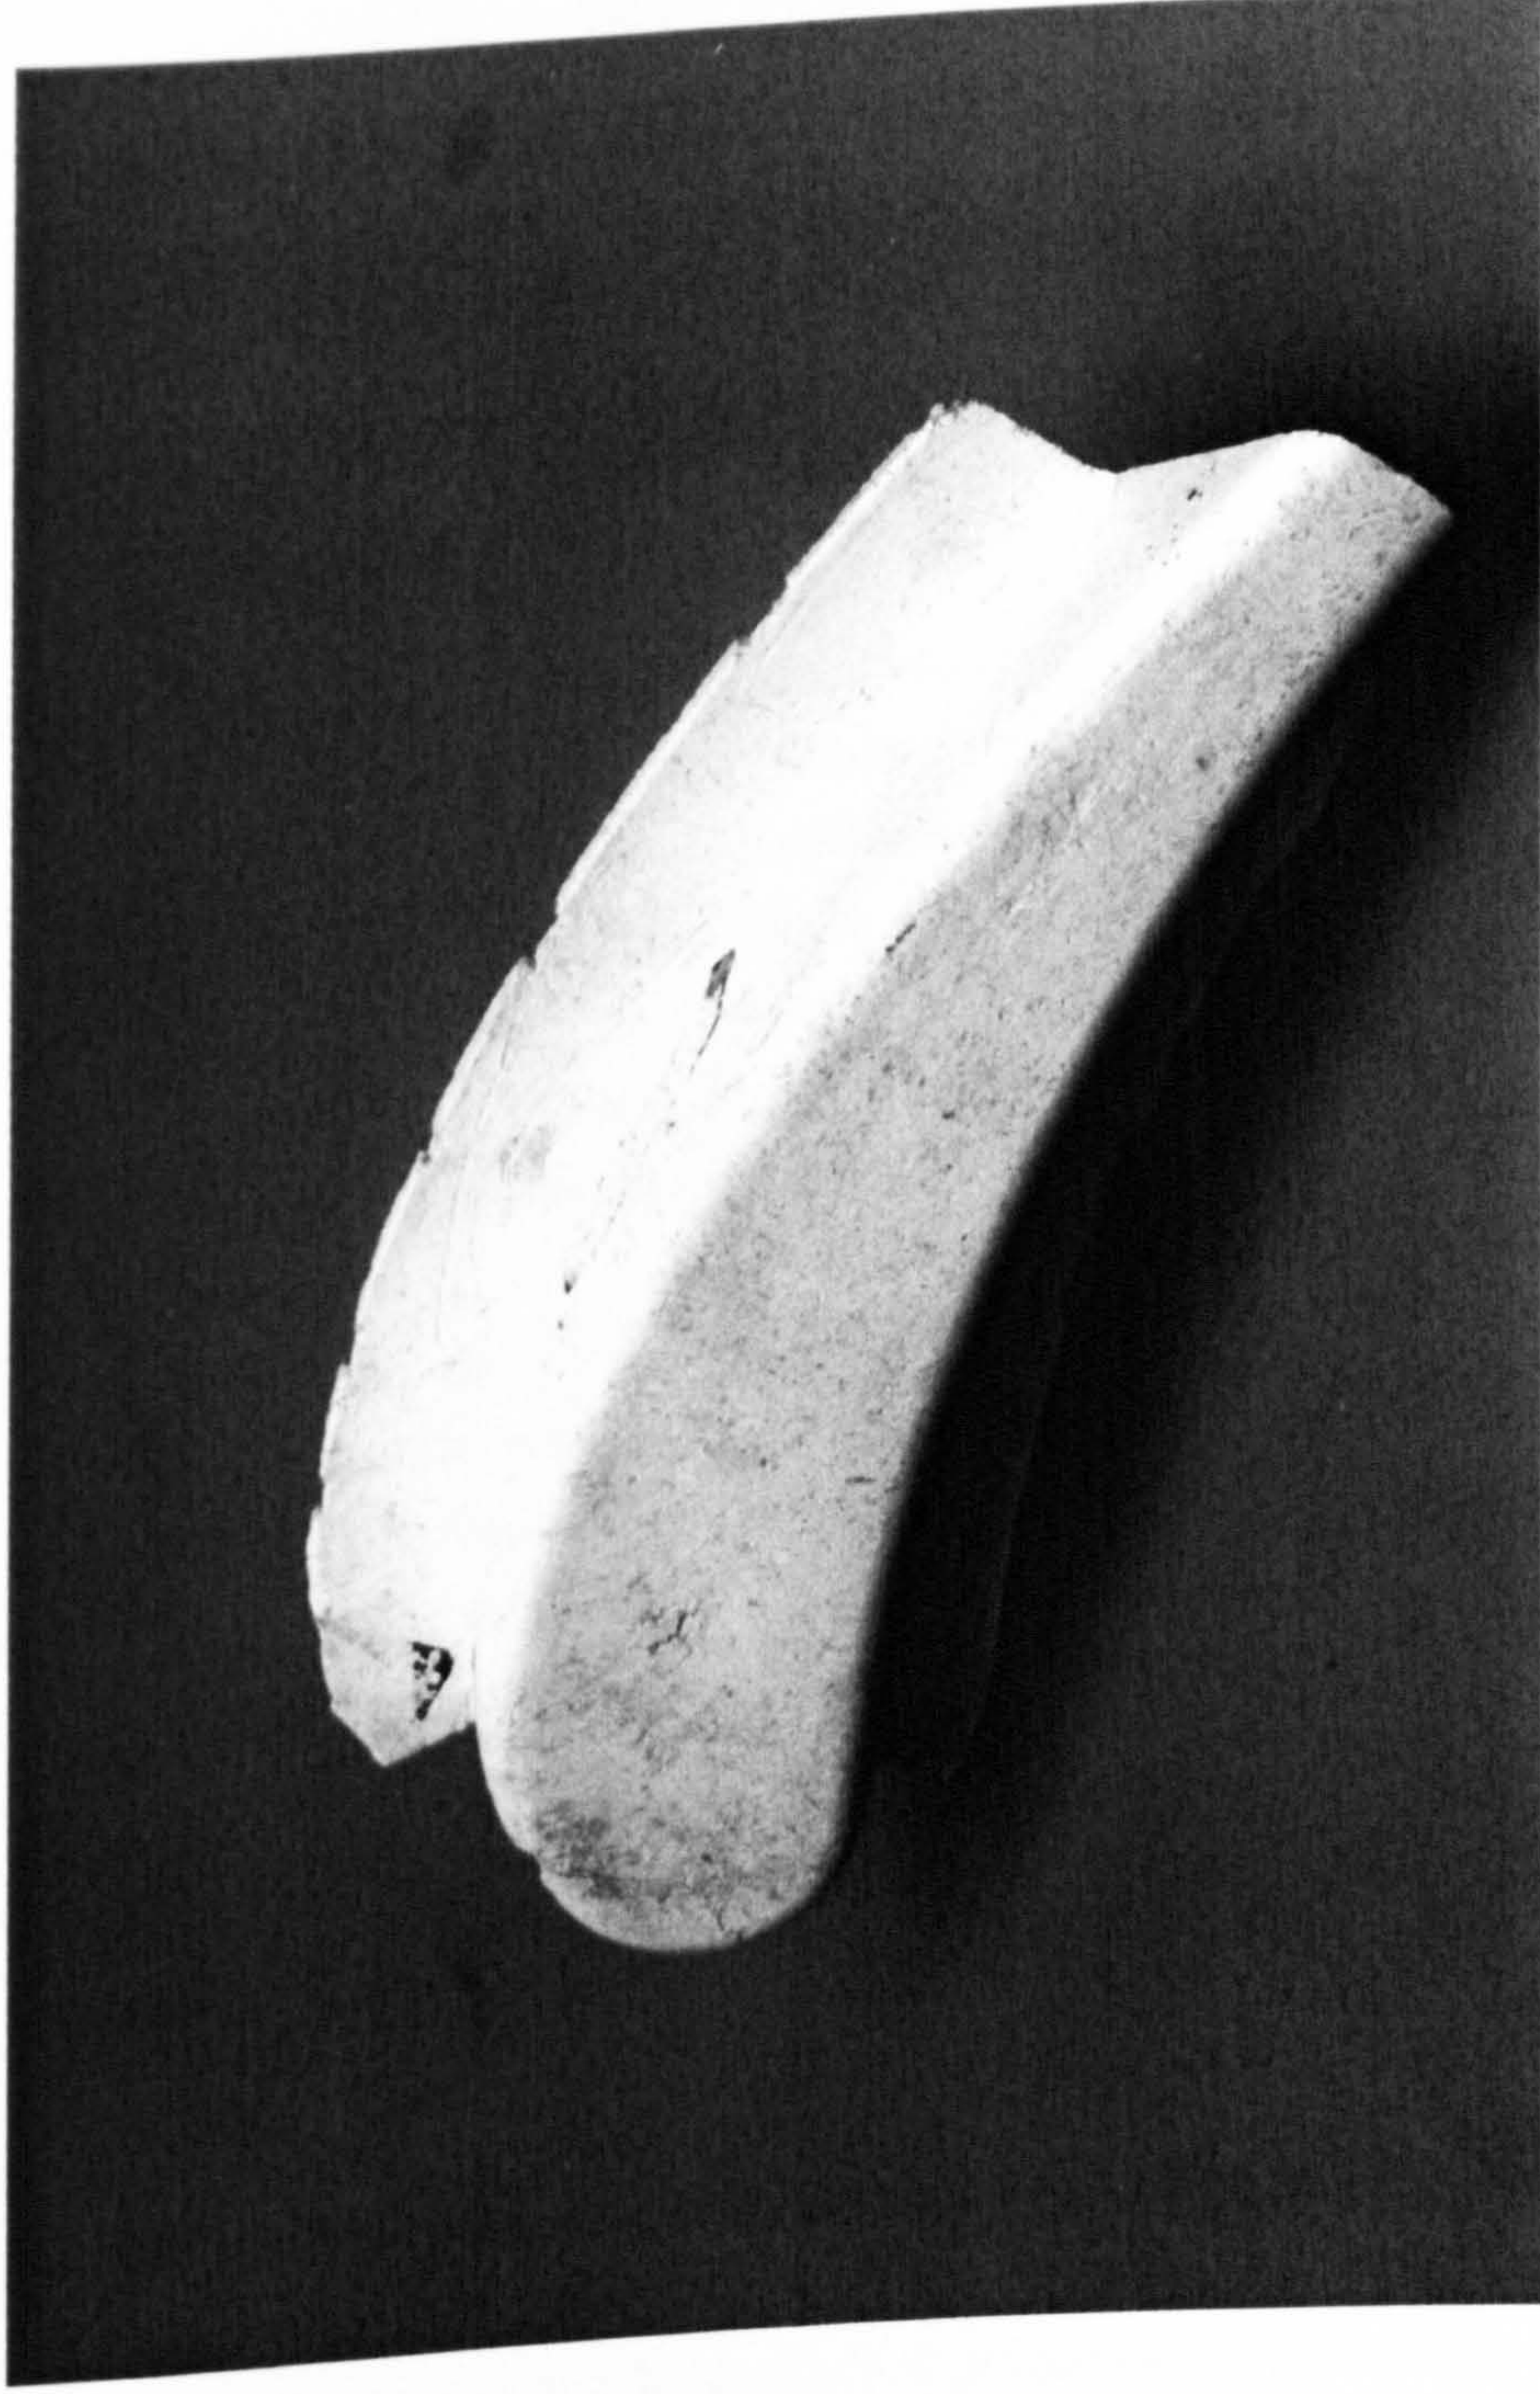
A photo of a fairing moulded from ceramic moulding compound. The mould used was a pair old graphite moulds for making advanced polymer composites at elevated temperatures.
